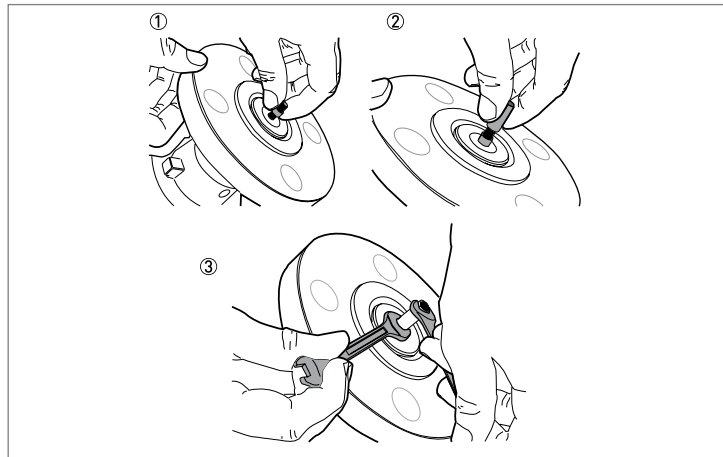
Assemble the Segmented Single Rod Probe part 1.
